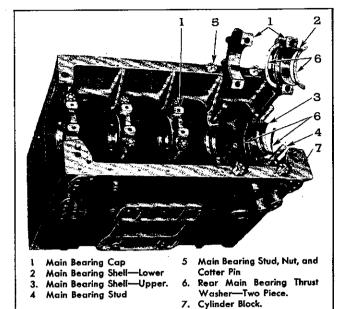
Upper and Lower Main Bearing Shells, Bearing Caps, and Rear Main Bearing Thrust Washers.
